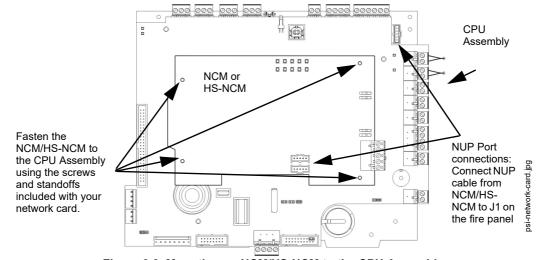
Mounting an NCM/HS-NCM to the CPU Assembly
